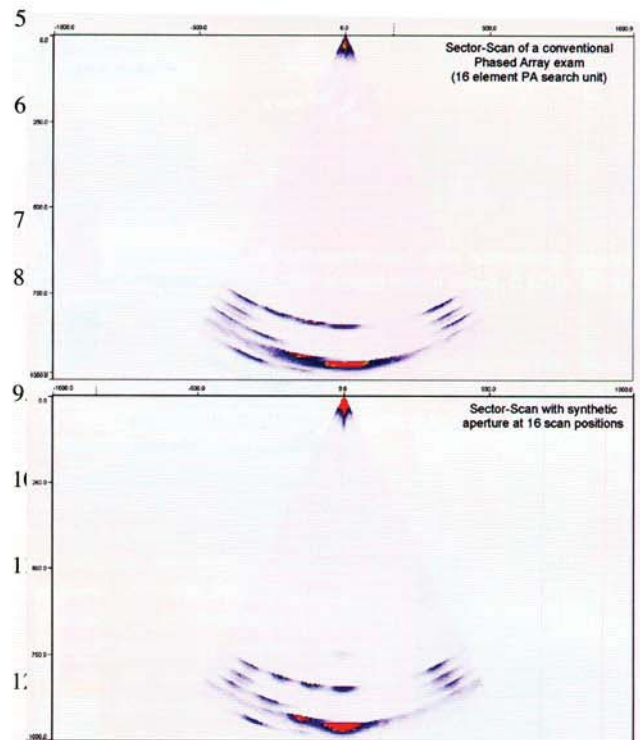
Ultrasonic inspection results of a 940 mm (37") diameter turbine shaft January 2006.
